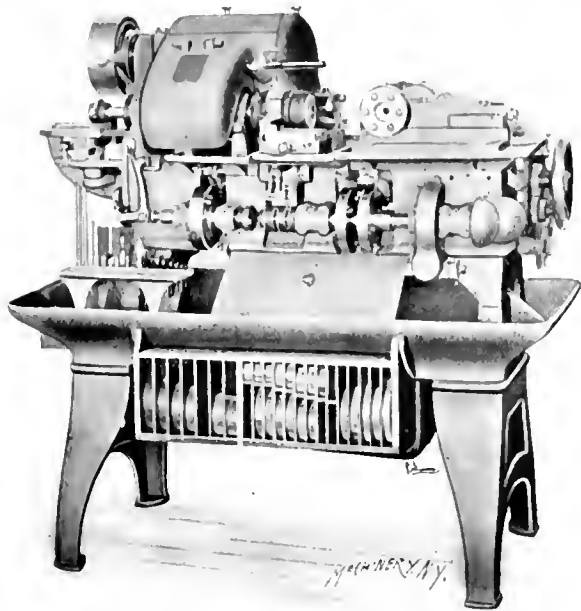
Brown & Sharpe Automatic Screw Machine, Fitted with Geared Drive, Operated by a Single Constant-speed Belt.
